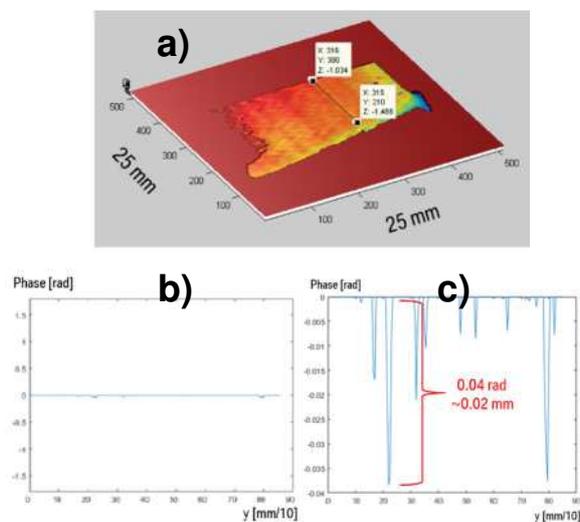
Inspection of a good part without defect. a) Phase map, b) Section view of phase signal, c) Zoom of b)
